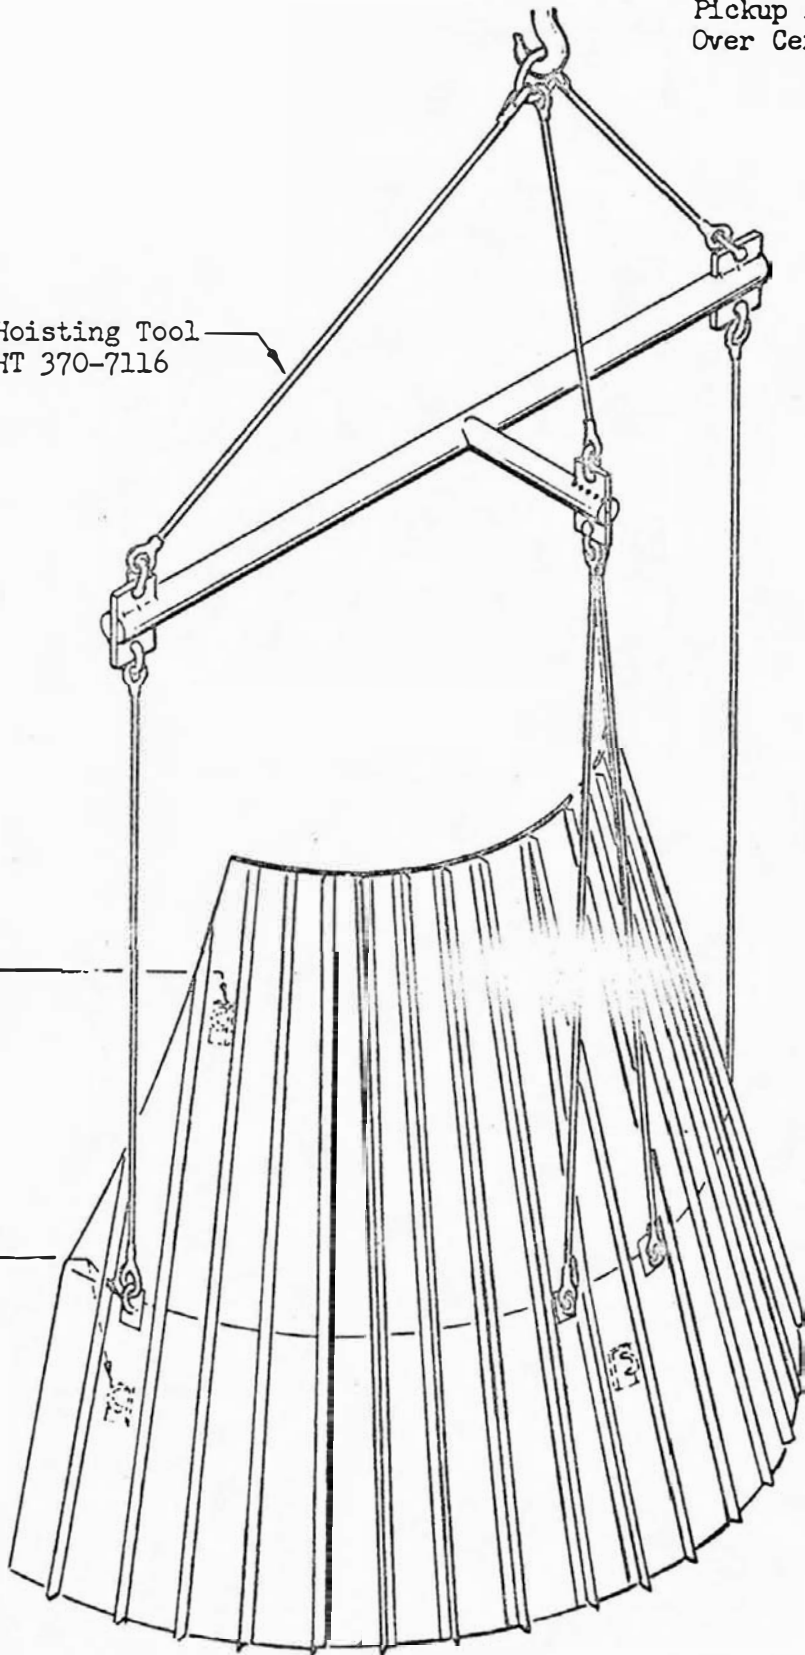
15. Hoisting Tool for Lower Fairing Subassembly
